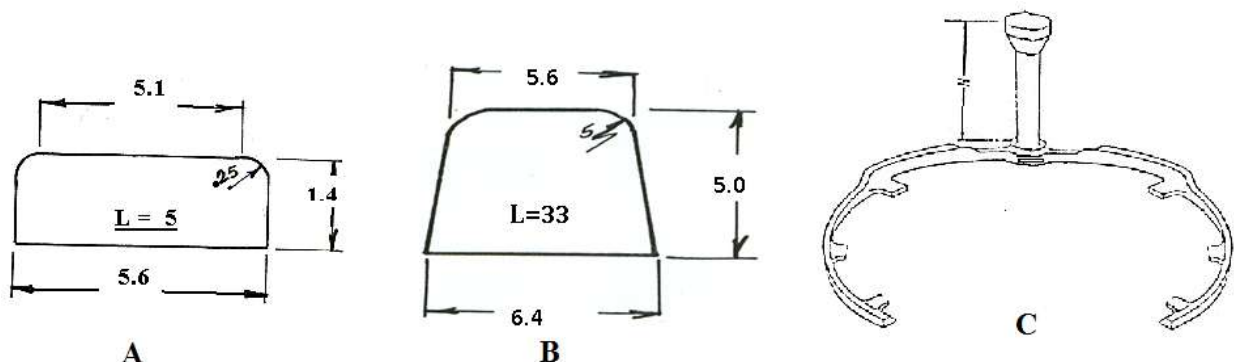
(A) Gate dimensions and shape, (B) Runner dimensions and shape, (C) overall shape of the gating system.
